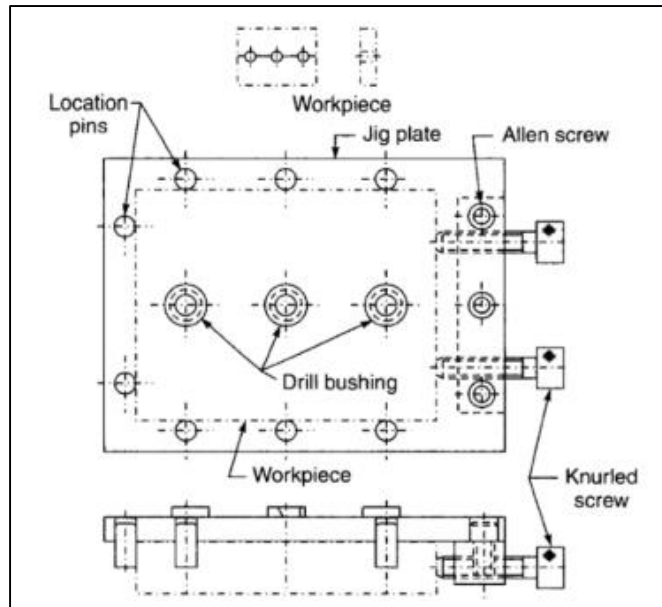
(b): Plate Type Jig (Joshi, 2003)
